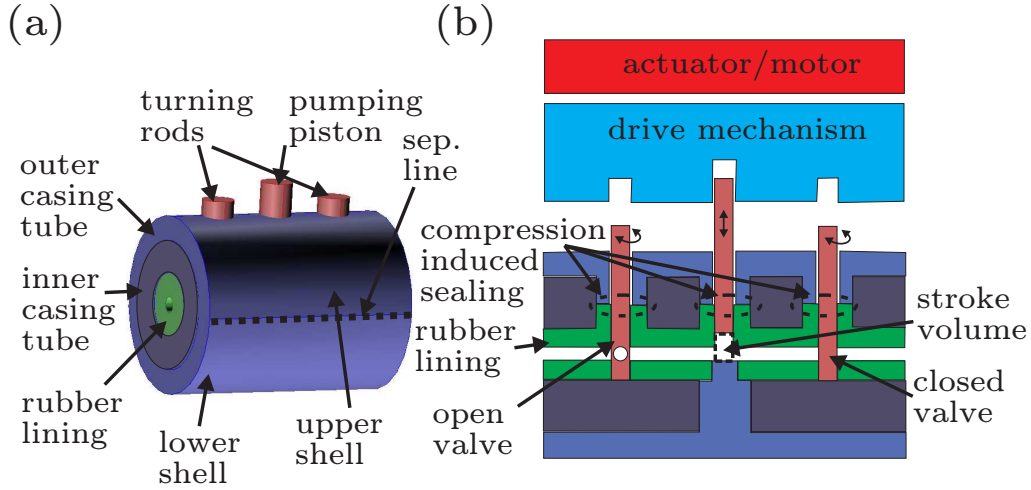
3D sketch of piston pump, using low energy turning valves with high pressure seals. Integration of two valves and a pump chamber. (a) 3D sketch of the pump consisting of an inner tube casing with a rubber lining. An outer tube casing ensures compression to avoid leakage. The outer casing is assembled by an upper and lower shell. (b) Cross-section of pump. An actuator and a drive mechanism is also indicated on the figure. The drive mechanism should ensure a reciprocating movement of the piston, and quarter-turnings of the valves. The stroke volume is indicated with a rectangular dashed box. Interface from where compression is generated are indicated with dashed ellipses.
